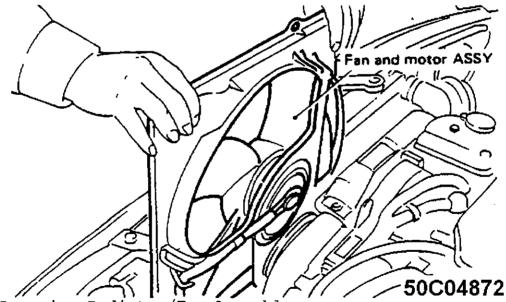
Removing Radiator/Fan Assembly Courtesy of Subaru of America, Inc.
